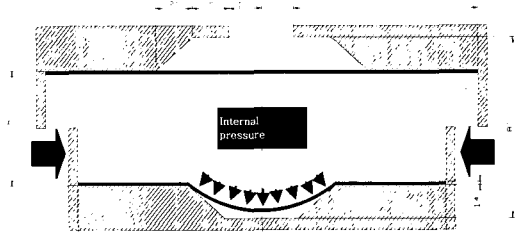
Dimensions and configurations of die and final bulged part [unit : mm]
